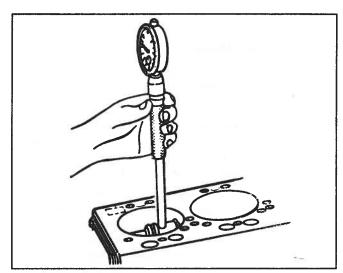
Using Telescoping Gauge To Check Cylinder For Taper And Out-of-Round
